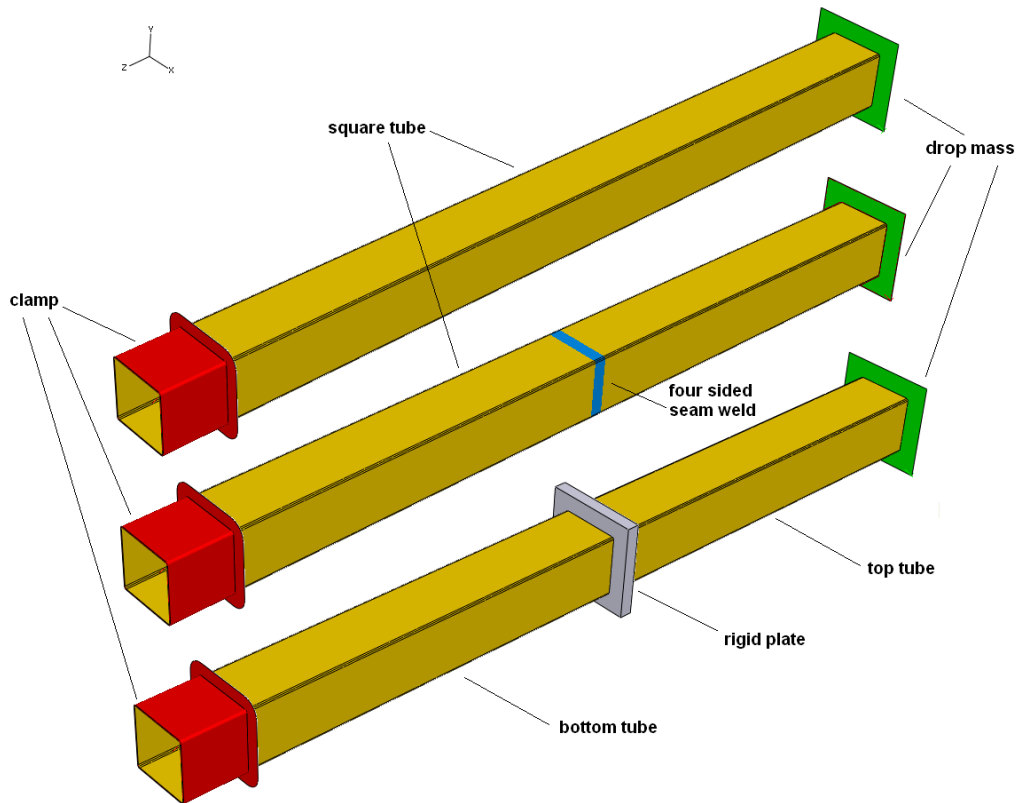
Labeled models of single, welded and plate divided specimens.
